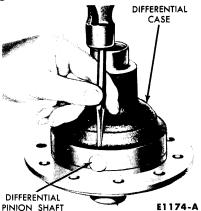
Differential Pinion Shaft Lock Pin Removal
